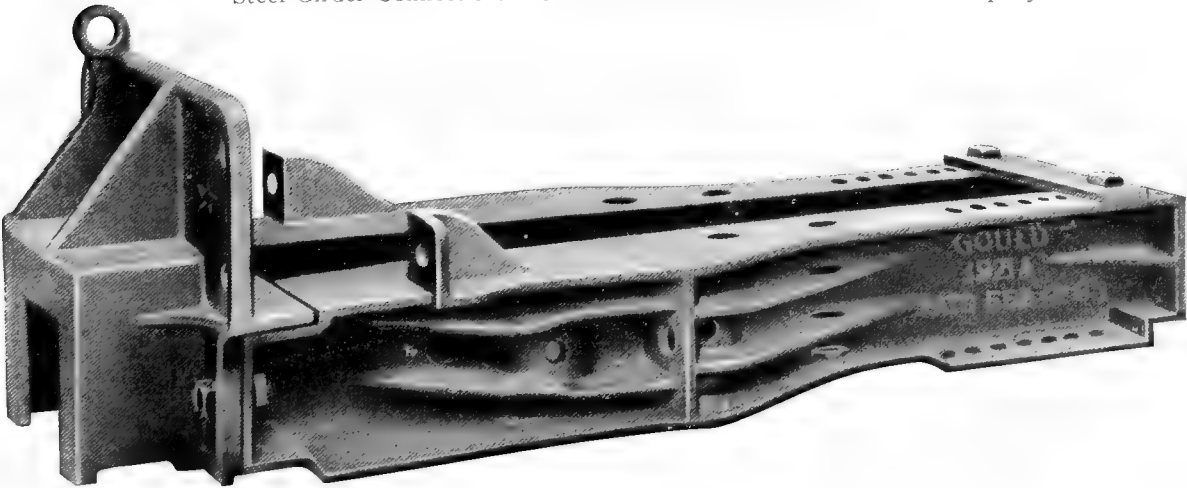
Steel Draft Sills Arranged for Fastening to Both Body Bolster and End Sill of Freight Cars. Gould Coupler Company.
